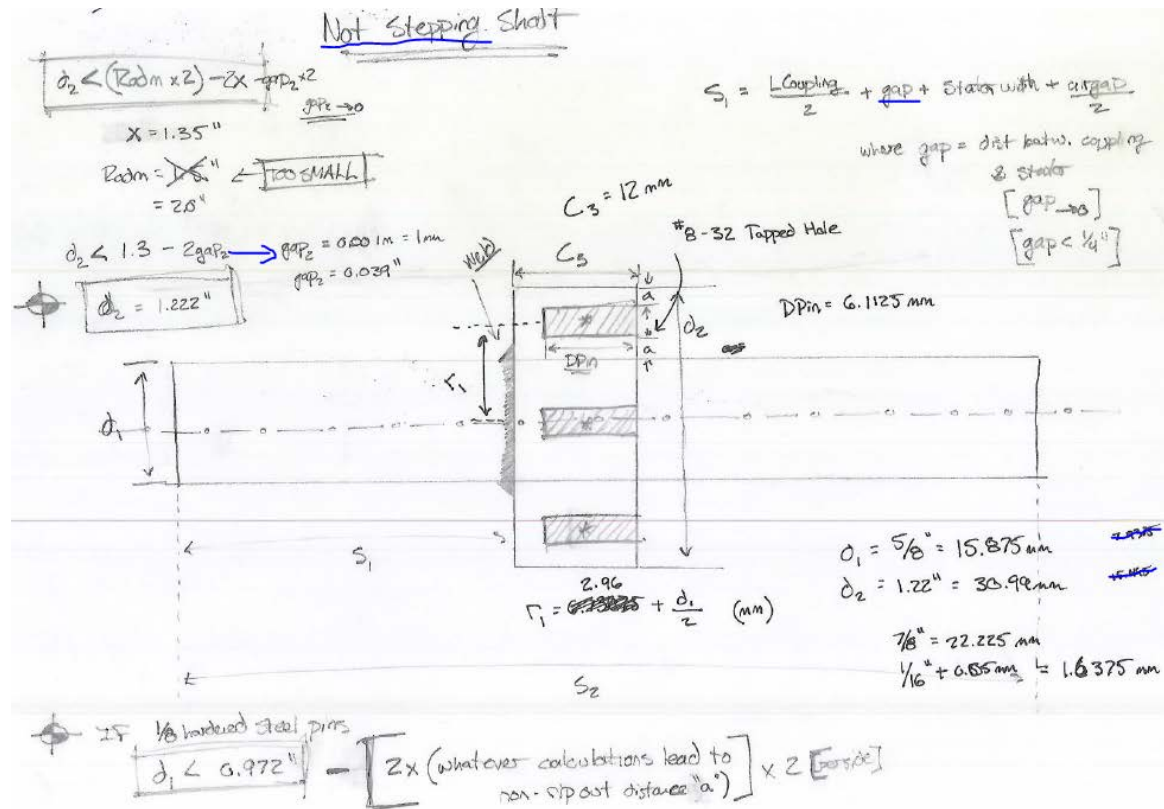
Image of my design concept sketch for the shaft. This sketch includes the collet that will be welded onto the shaft and some calculations for the dimensions of the shaft
